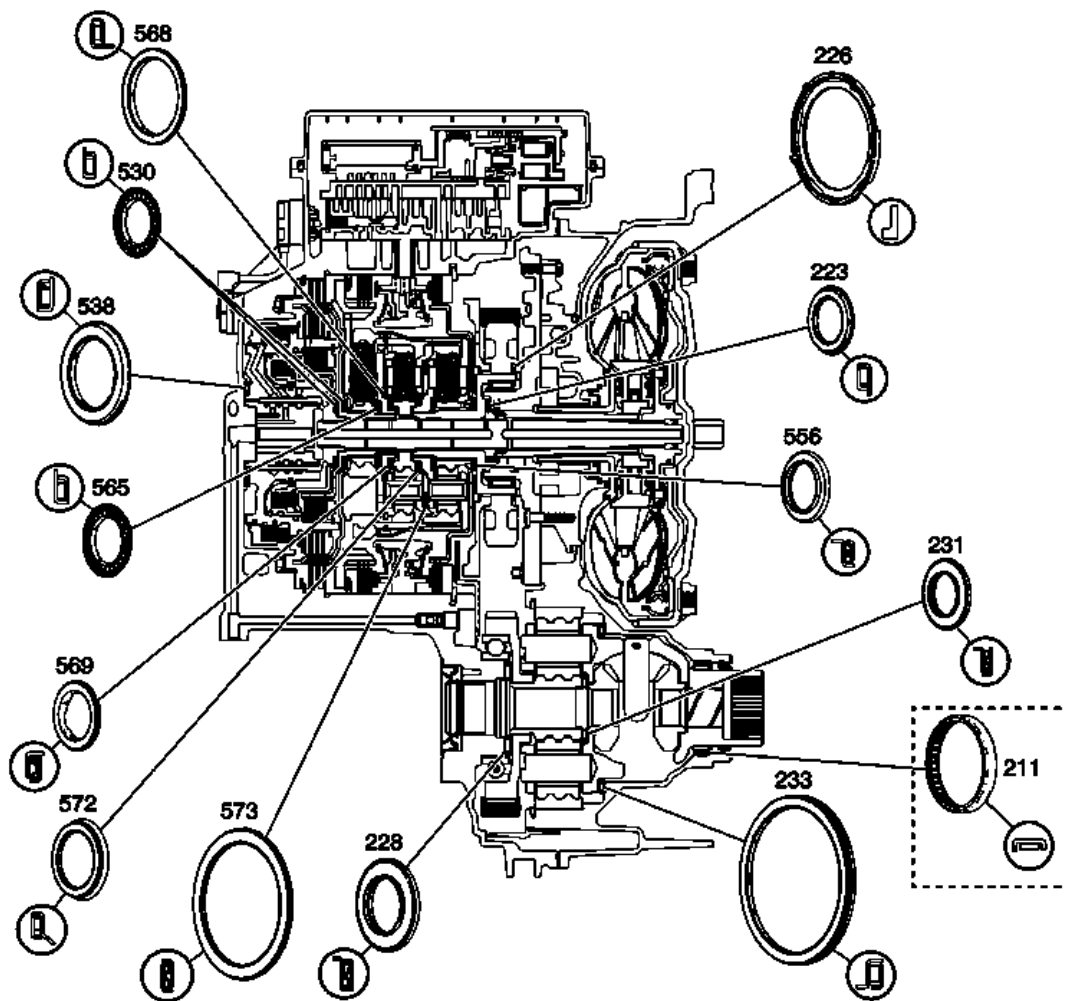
Bushing, Bearing, and Washer Locations (Gen 2/Hybrid)
